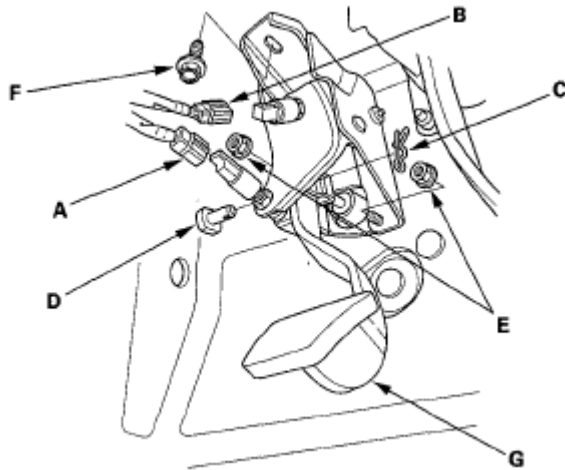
Identifying Clutch Pedal Position Switch Connector And Clutch Interlock Switch Connector
